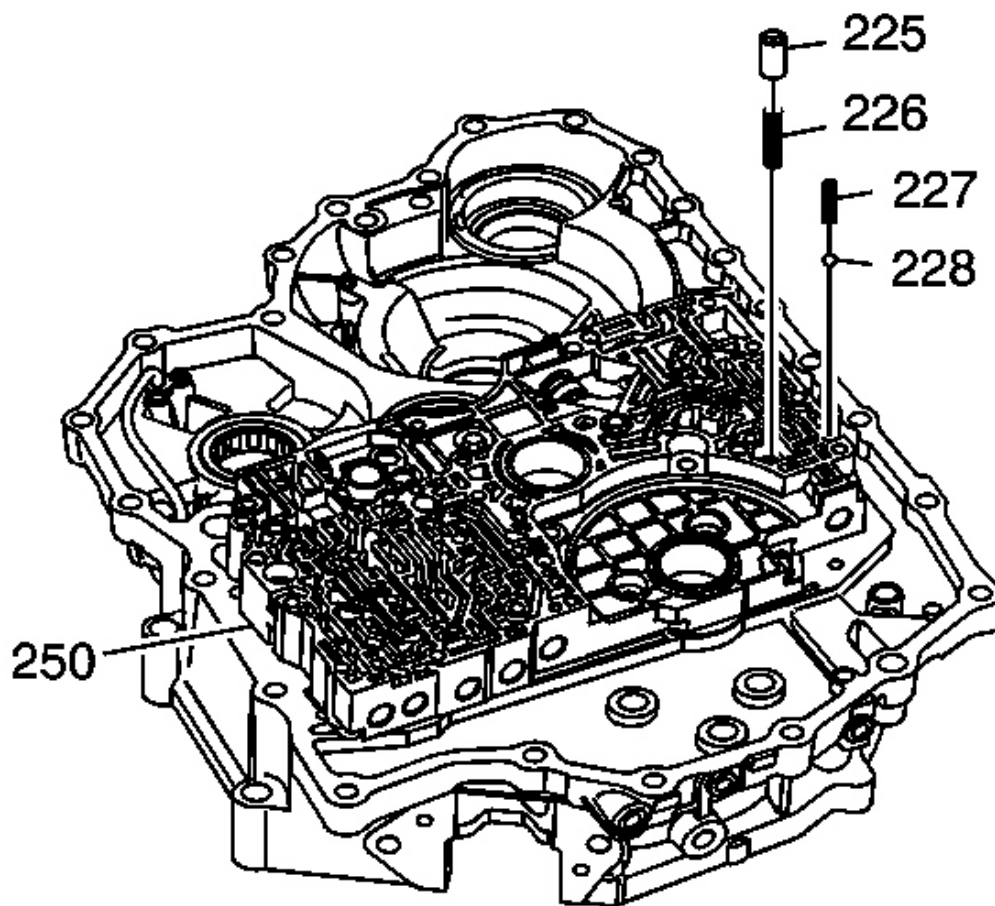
Torque Converter Check Valve, Return Spring, Transmission Fluid Cooler Check Valve & Oil Cooler Check Return Spring
